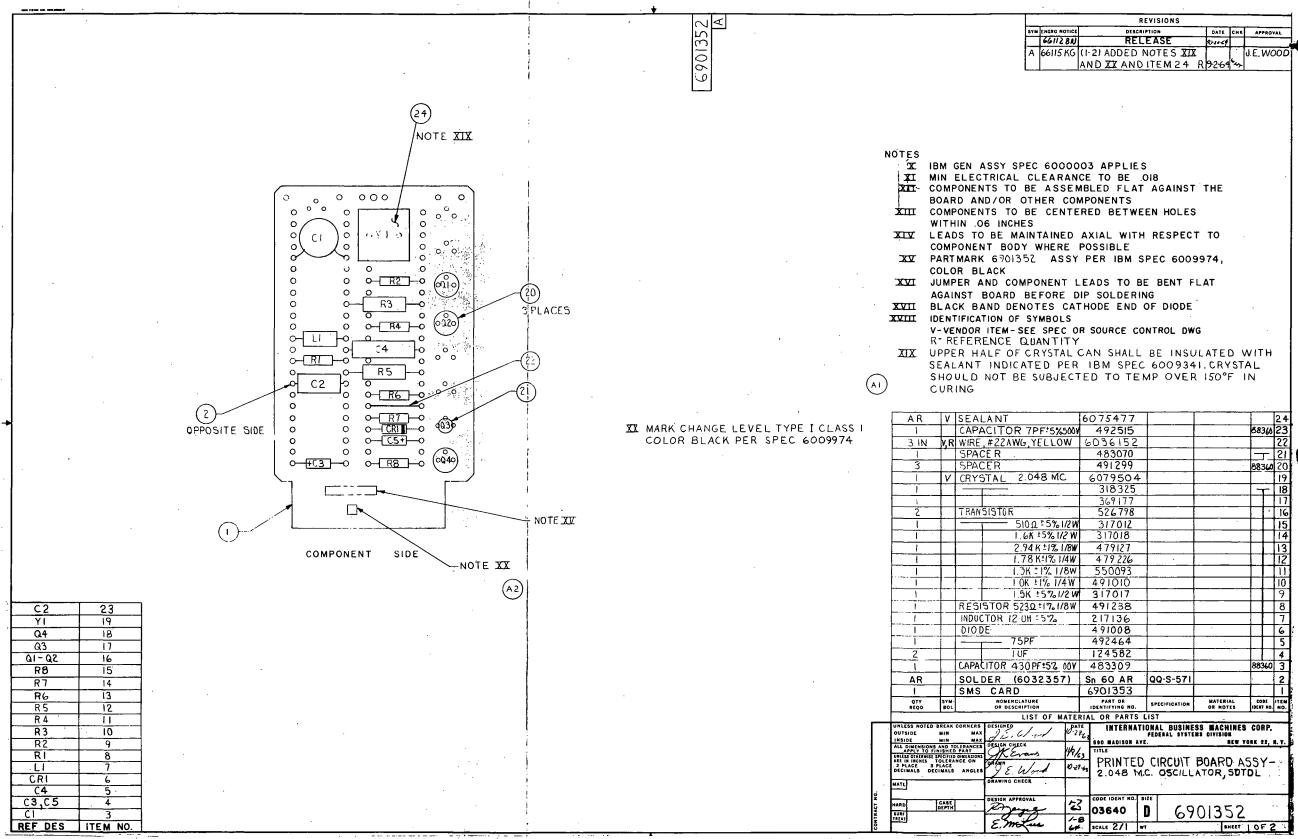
SDTDL 2.048 MC Oscillator Printed Circuit Board Assembly (6901352) (Sheet 1 of 2)
